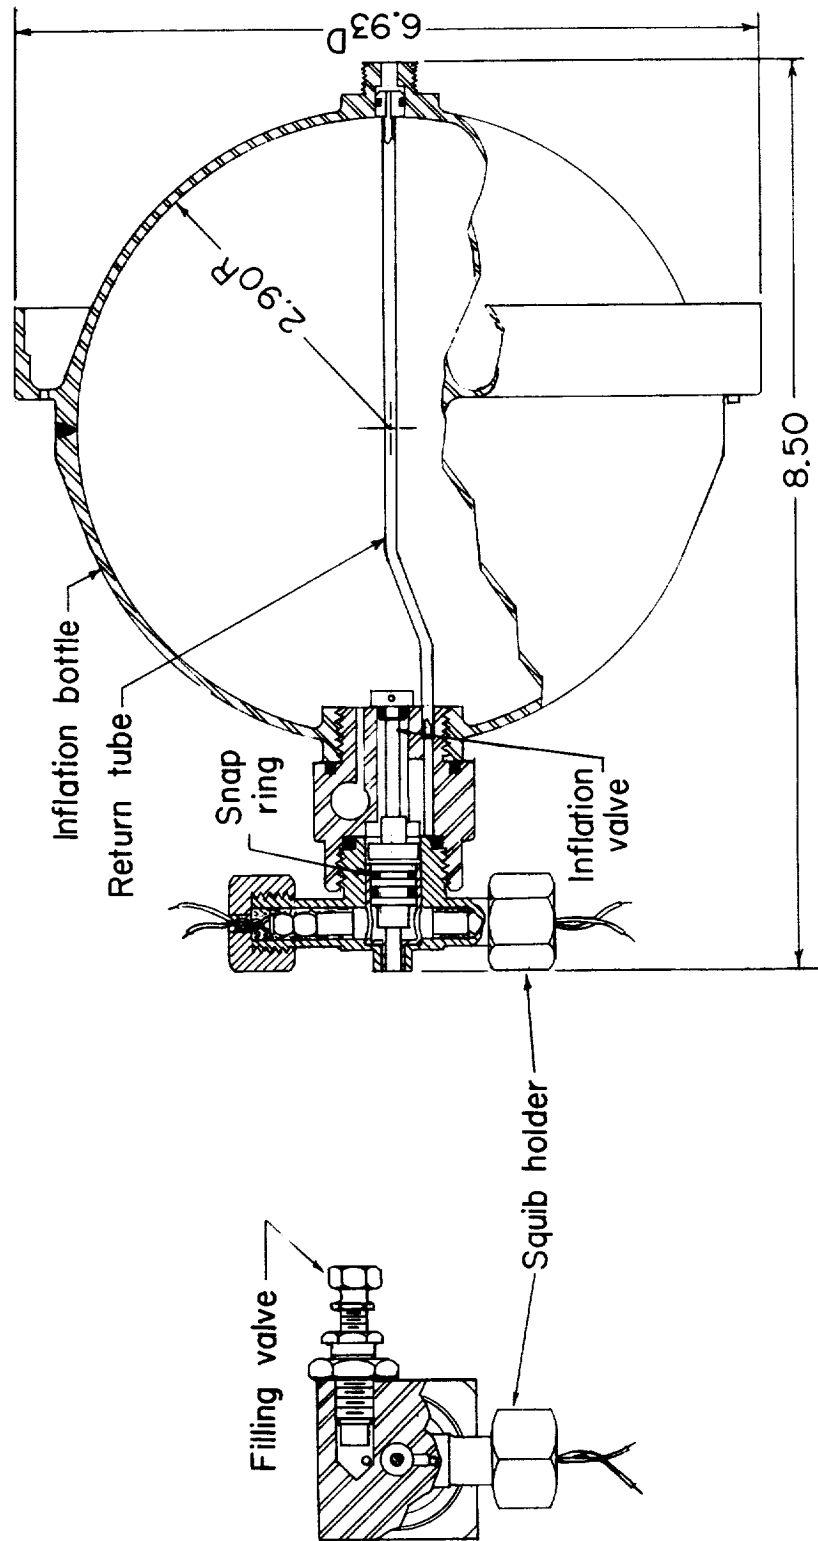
Inflation bottle and valve mechanism used with the 12-foot-diameter inflatable sphere. (All dimensions are in inches.)
